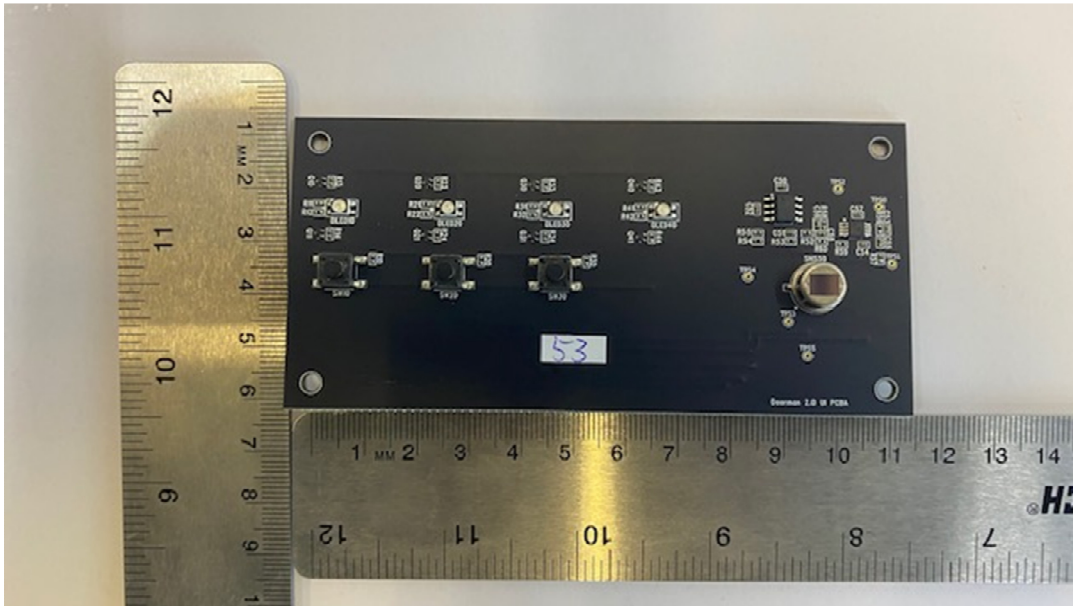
RAC00-17202 – Electronic Module PCB (Front side)
